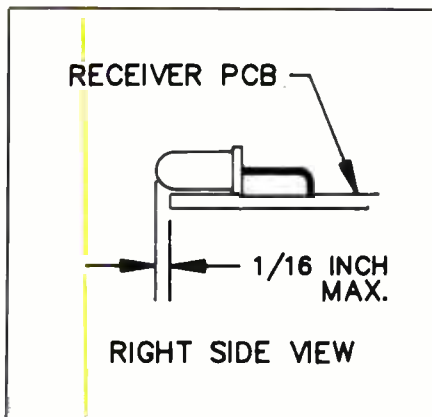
Mounting details for the LEDs on the receiver pc-board.
